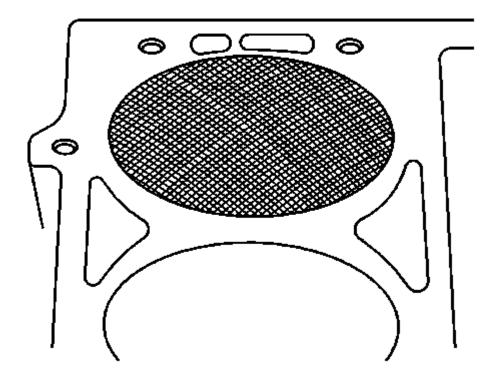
Identifying Cylinder Bore Cross Hatch Pattern Courtesy of GENERAL MOTORS CORP.
